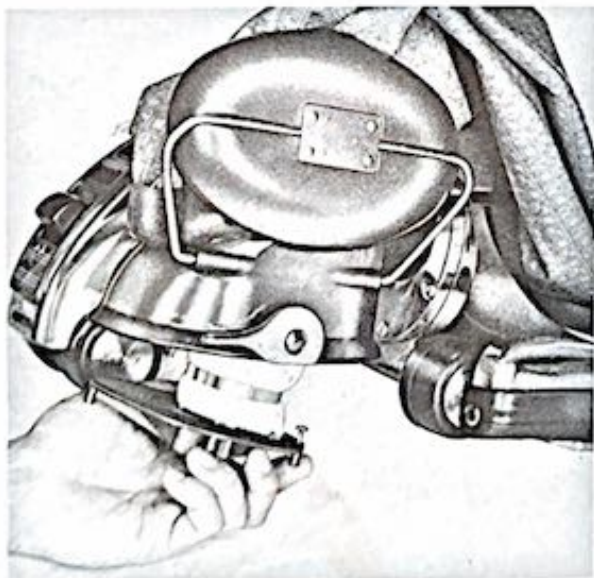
Filler tube and adapter cover through bottom of Sani-Em-Tor body
